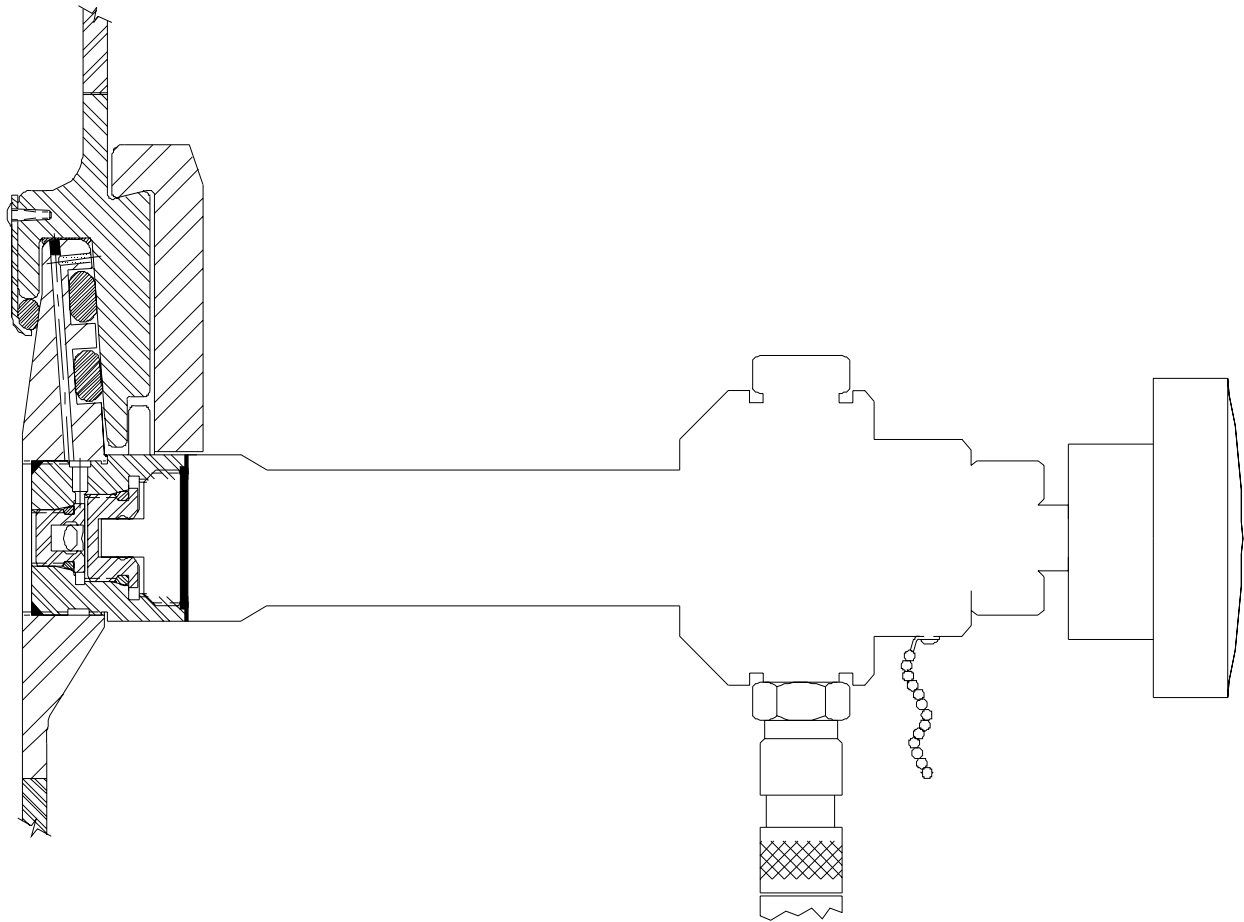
OCV Seal Test Port Plug Installation/Removal Tool (2077-094-A1)
